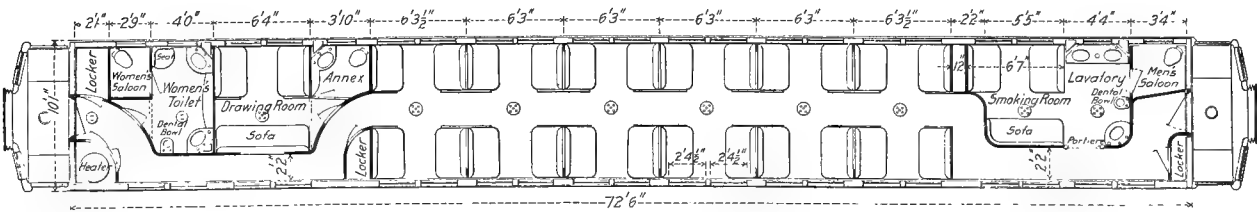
Floor Plan of Chicago, Milwaukee & St. Paul Sleeping Car. Builder, The Pullman Co.
